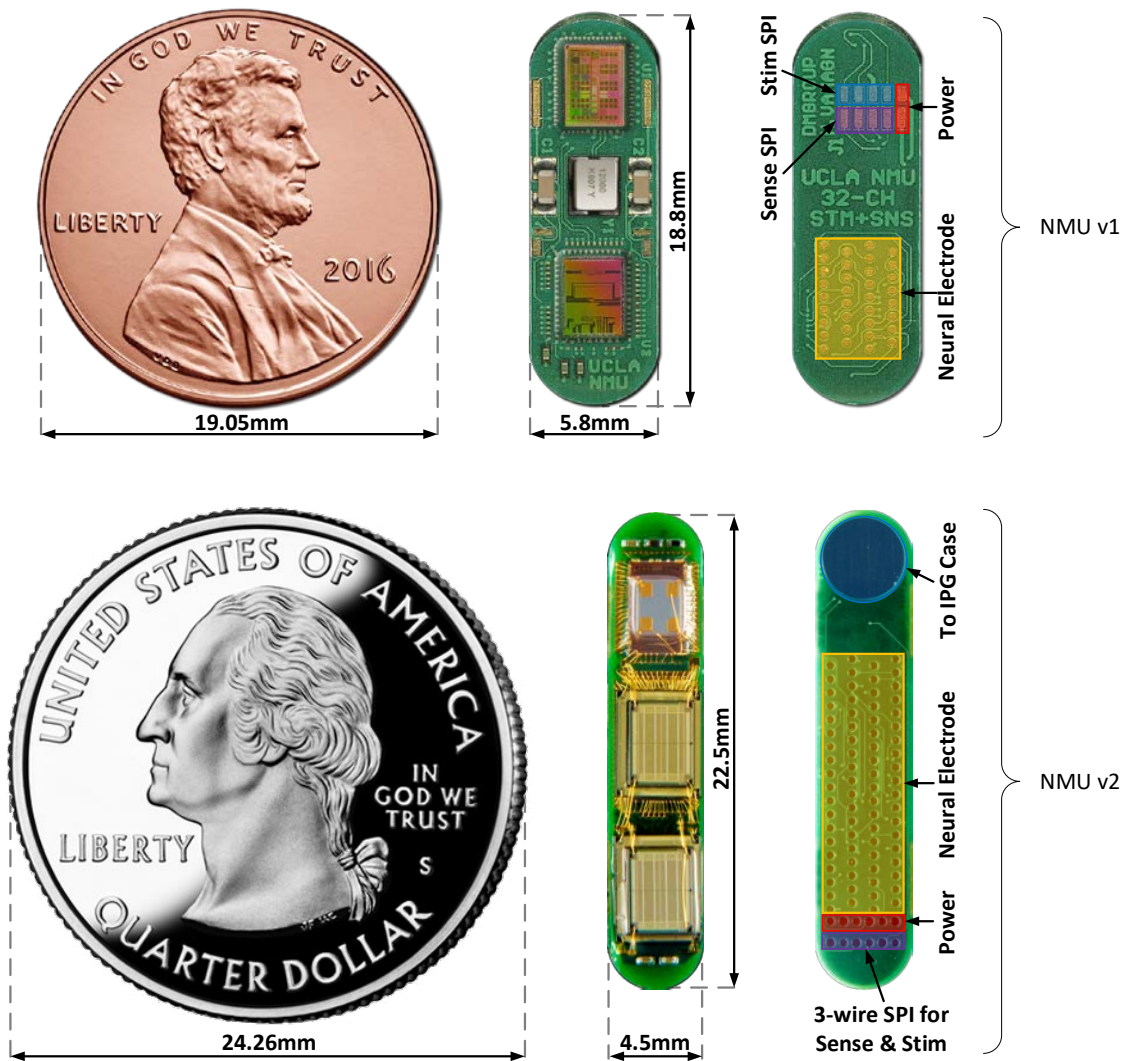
The top and bottom sides of v1 and v2 of the proposed NMU PCB assembly.
